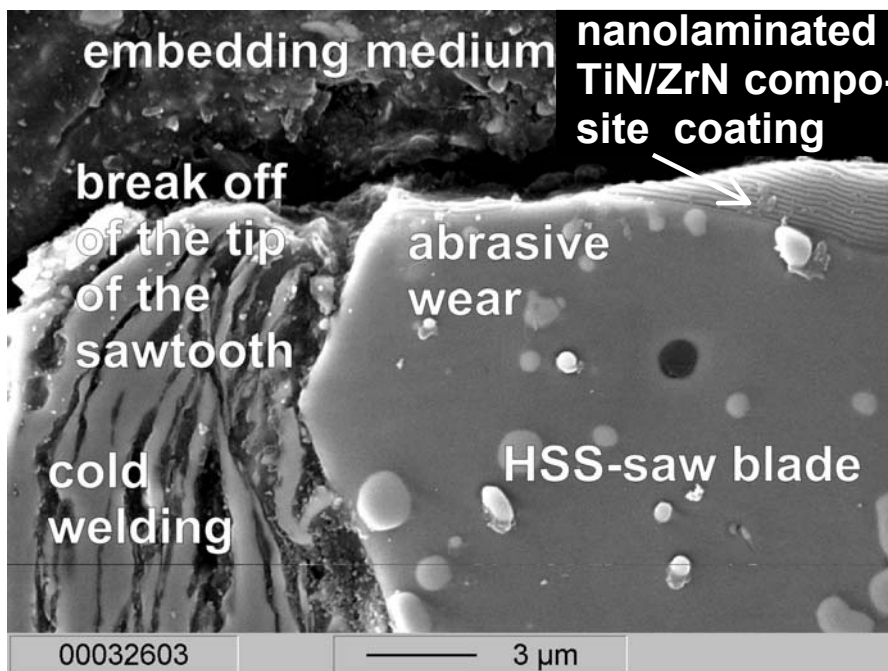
SEM cross section of the tip of a saw blade with a cold welding.
